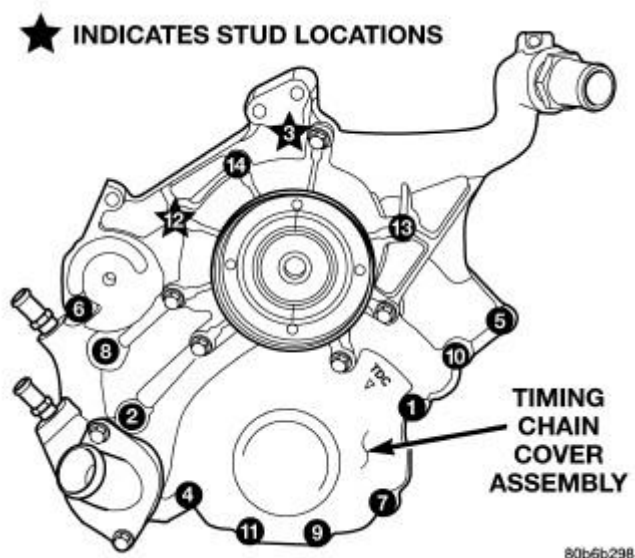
Timing Chain Cover Fasteners Removal/Installation Sequence
